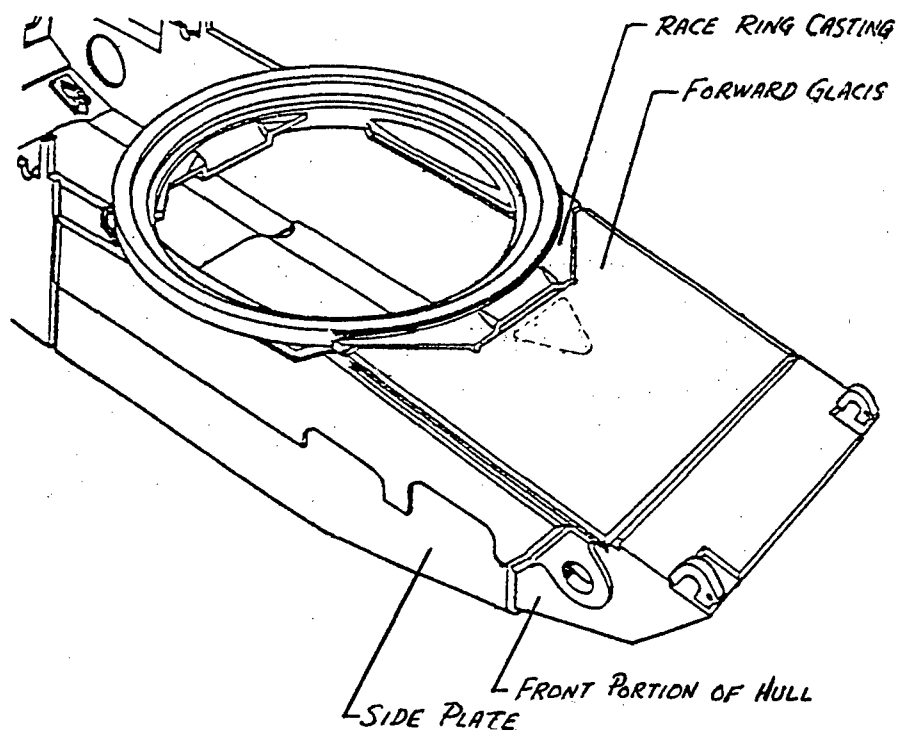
M1A1 Welding Isometric, Hull Structure
